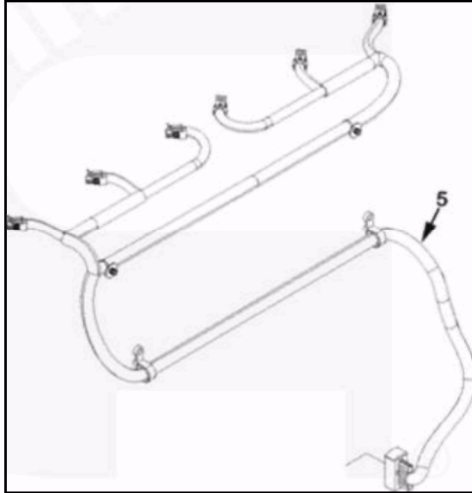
Ignition Control Module Wiring Harness Assembly
